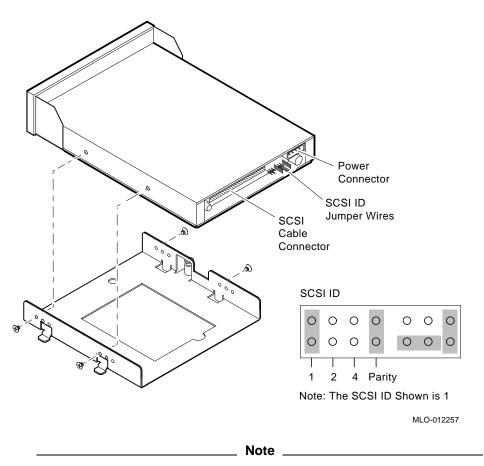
shows a mounting bracket being attached for mounting in the right-hand position; the bracket must be reversed for mounting in the left-hand position.
